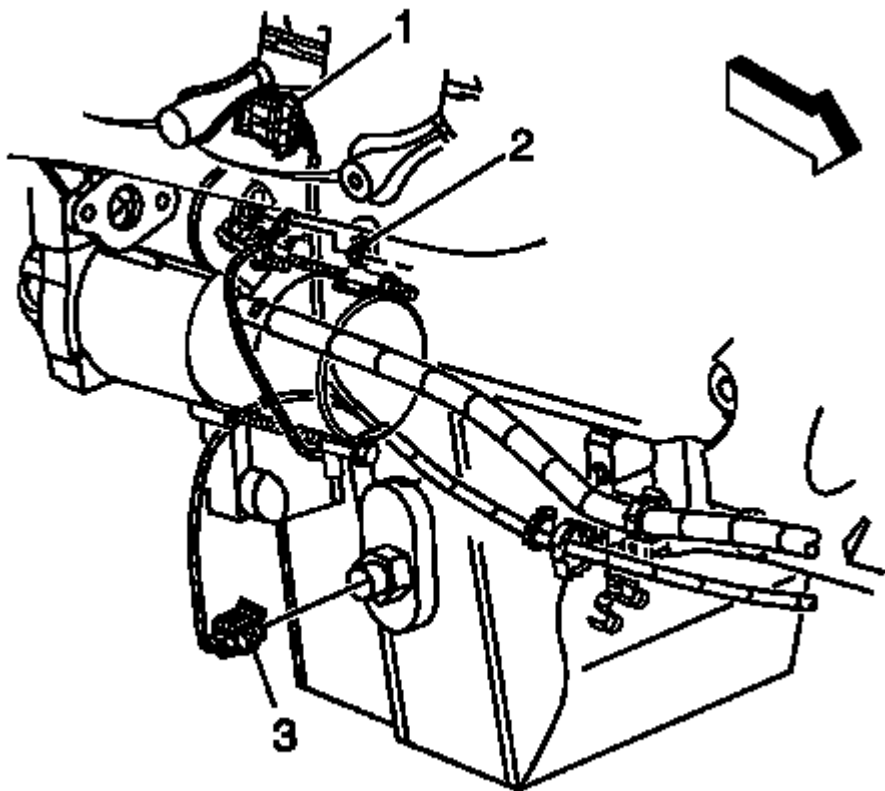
View Of Oil Level Sensor & CKP Sensor Electrical Connector
